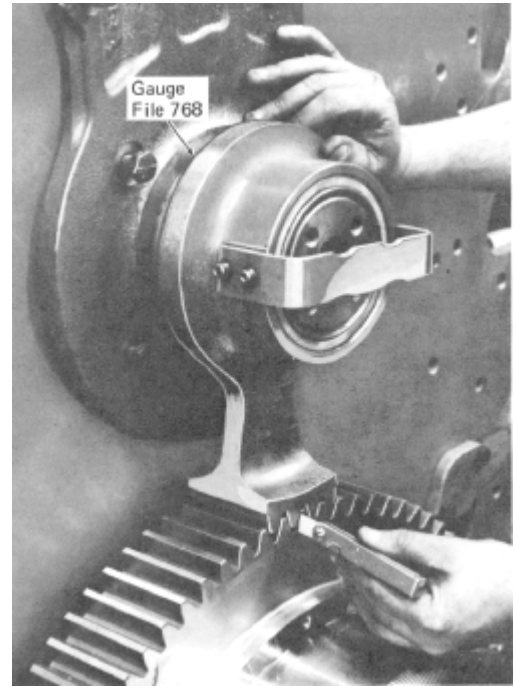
Checking No. 1 Idler Gear To Crankshaft Gear Backlash
